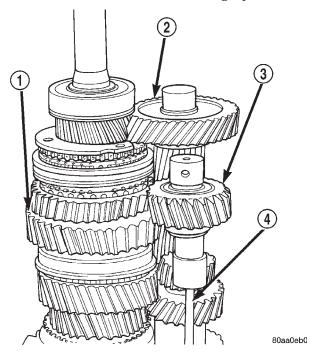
Reverse Idler Assembly Positioned On Assembly Fixture Pedestal
